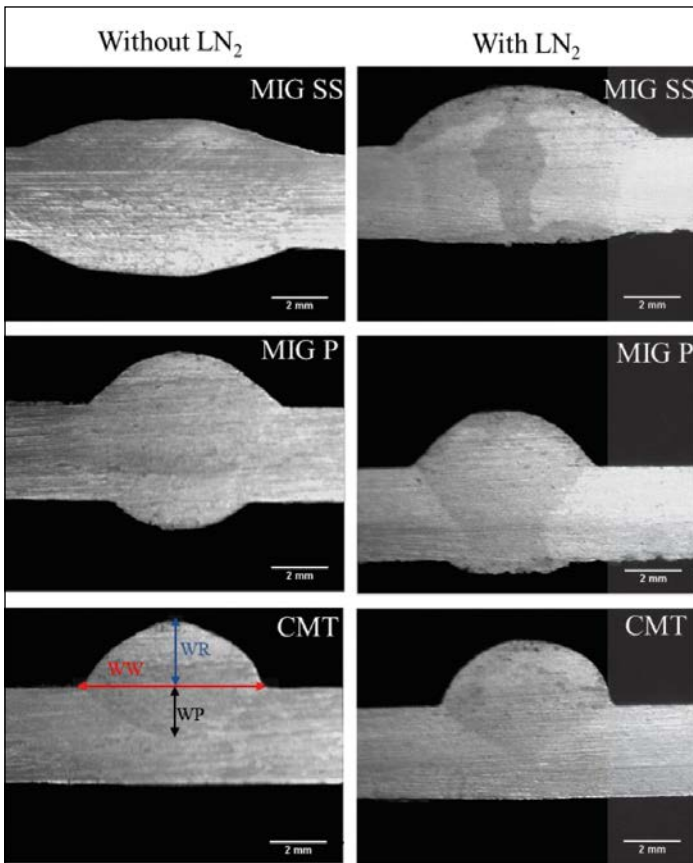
Macroscopic images of the three different welding techniques with varying conditions at the same process parameter.
